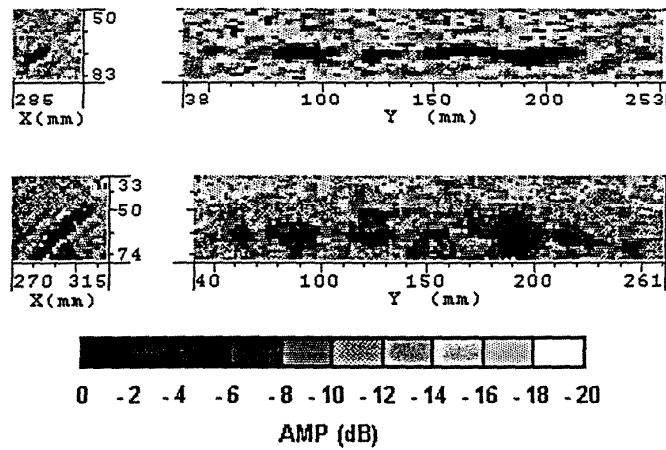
B-SCAN (LEFT) AND D-SCAN (RIGHT) VIEWS OF A 22 MM HIGH MECHANICAL FATIGUE CRACK IN SPECIMEN W455-D; 1 MHZ FOCUSED BEAM PROBE (TOP) AND V3326R TRANSDUCER (BOTTOM)
